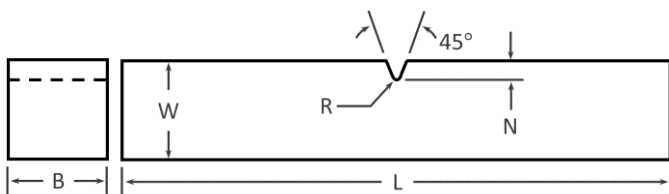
SIDE AND FRONT VIEWS OF THE CHARPY SPECIMEN. DIMENSIONS ARE GIVEN IN TABLE 3.
